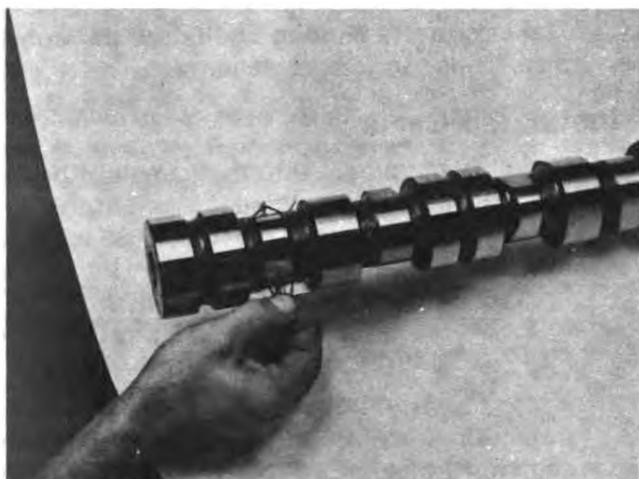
(N114254). Install The Pilots Onto The 2½ Inch Camshaft.
